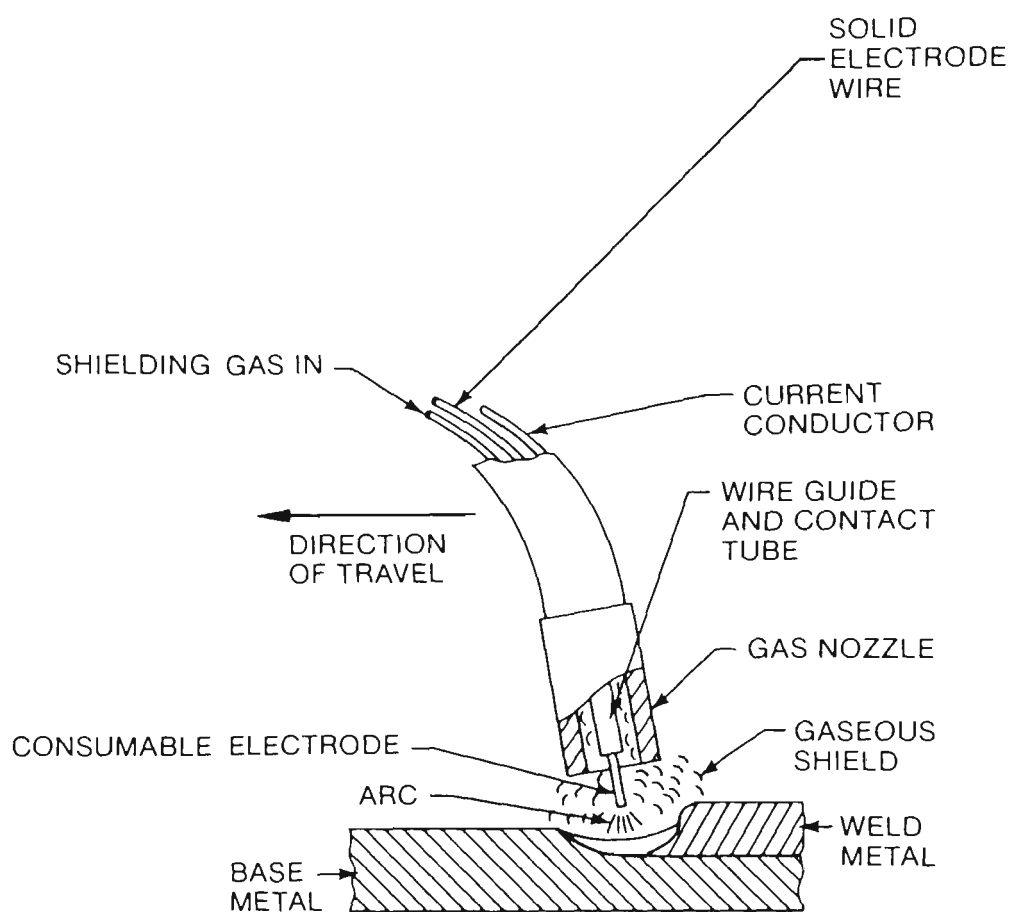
Principle of the Gas Metal Arc Welding (GMAW) process
